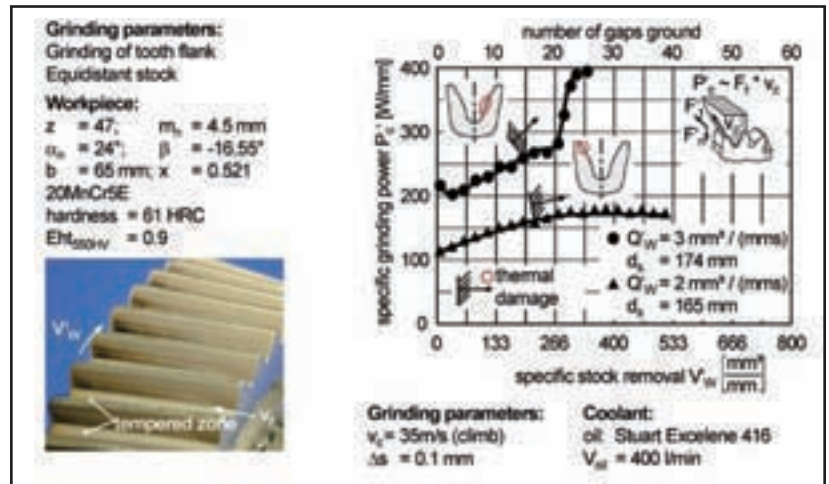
Typical grinding burn for equidistant infeed of the grinding wheel.
